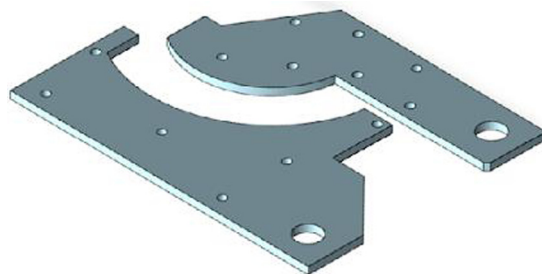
3D view of the Al plates mounted on the PCB bottom.
